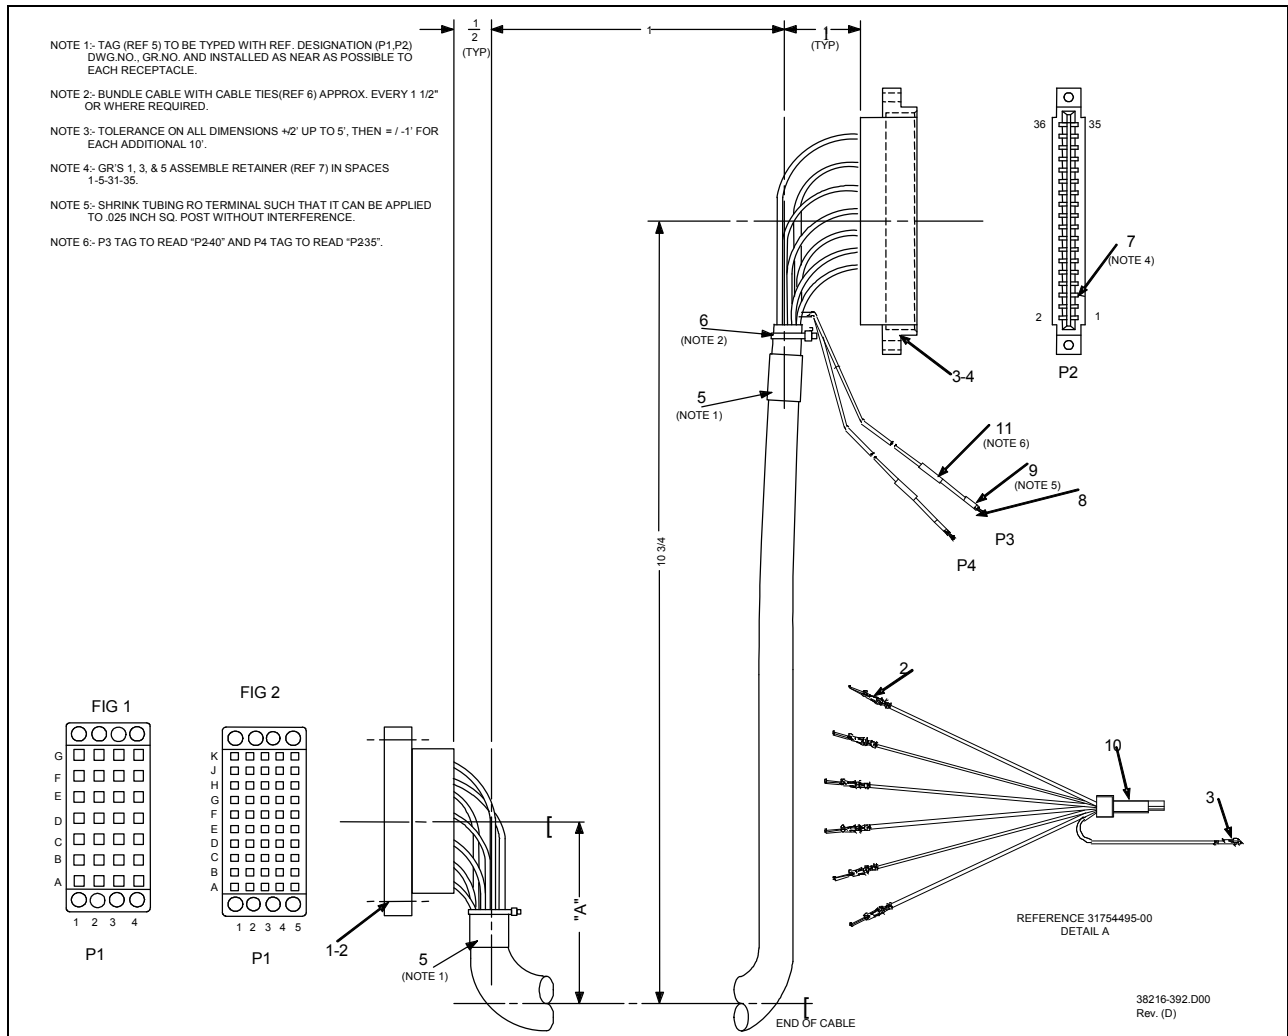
Cable, Board Edge Connector, P/N 38216-392-01 thru -06
